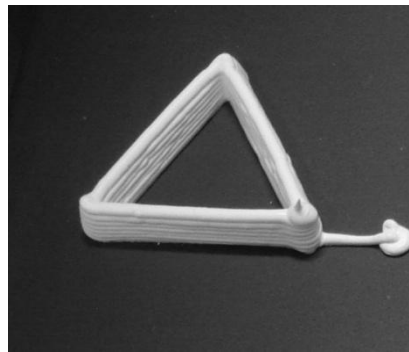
Printed layers Formula F3-2 printed layer by layer
